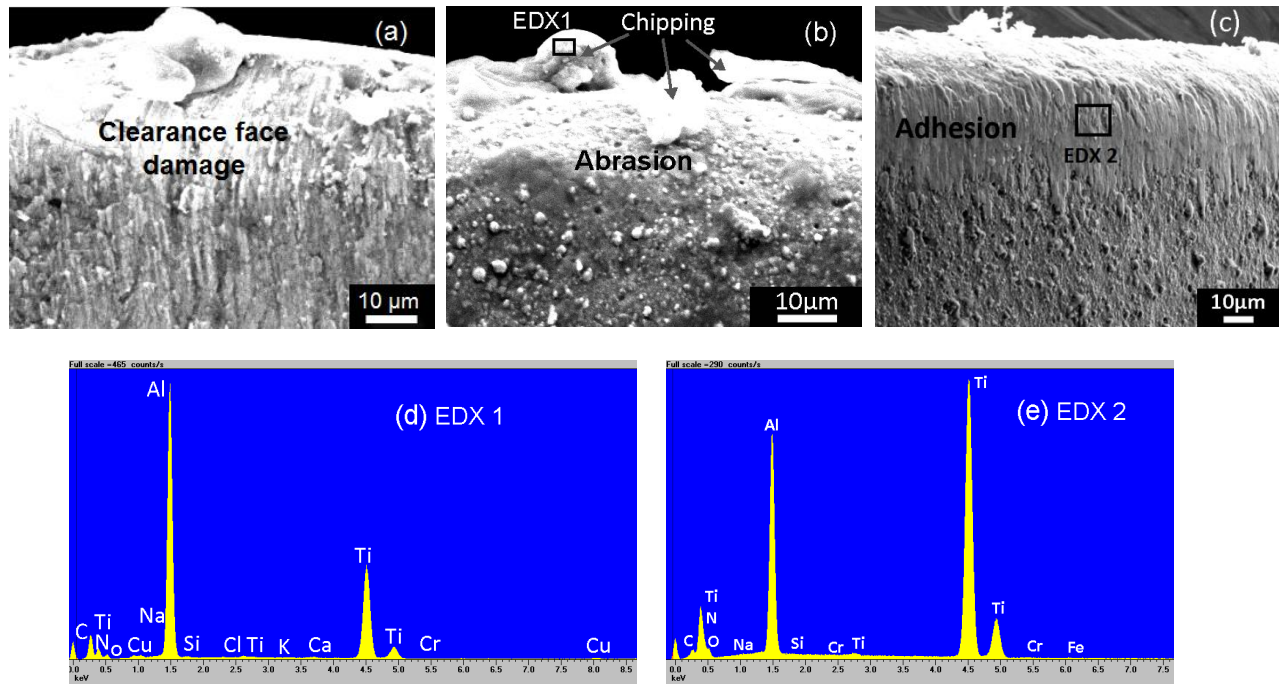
Initial tool wear mechanism at the first moment cutting (0.05 sec); (a) V=20 m/min; (b) V=40 m/min; (c) V=60 m/min, (d & e) EDX analysis
